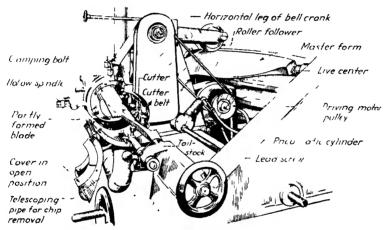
Onsrud forming lathe shaping a gunstock.
